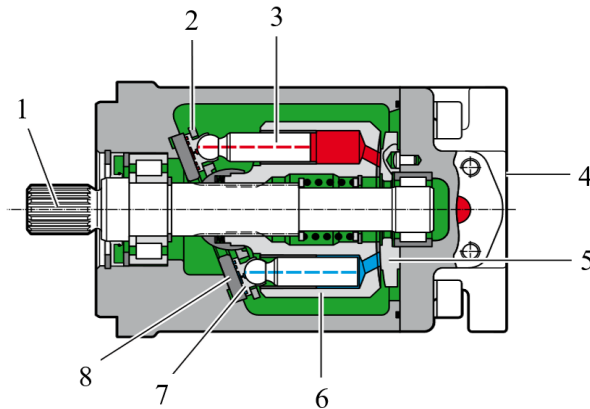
Axial piston motor scheme. (1) Drive shaft, (2) retaining plate, (3) piston, (4) port plate, (5), control plate, (6) cylinder, (7) slipper pad and (8) swash-plate. Adapted from [214].
